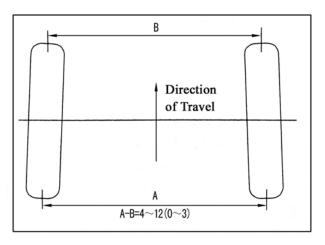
Adjustment Diagram of Toe-in of Front Wheel The following are the adjusting steps:
